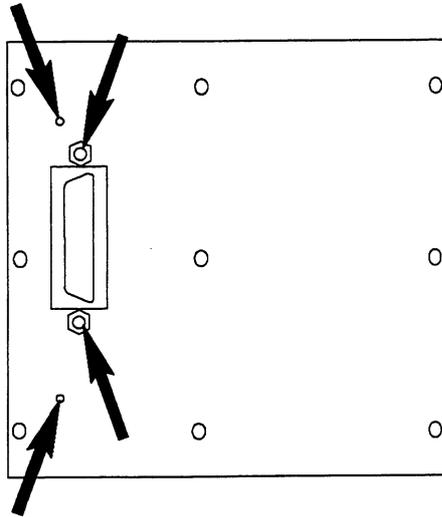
Removing the Rear Panel from the Main CPU
